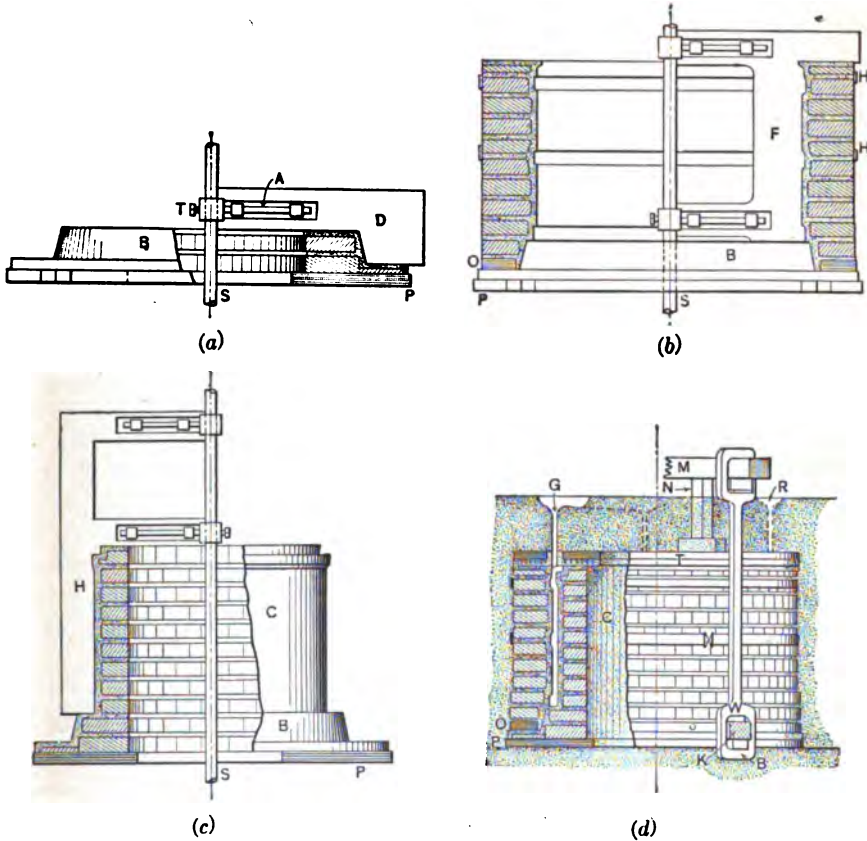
Successive Operations in Making a Loam Mold. (Bale.)
